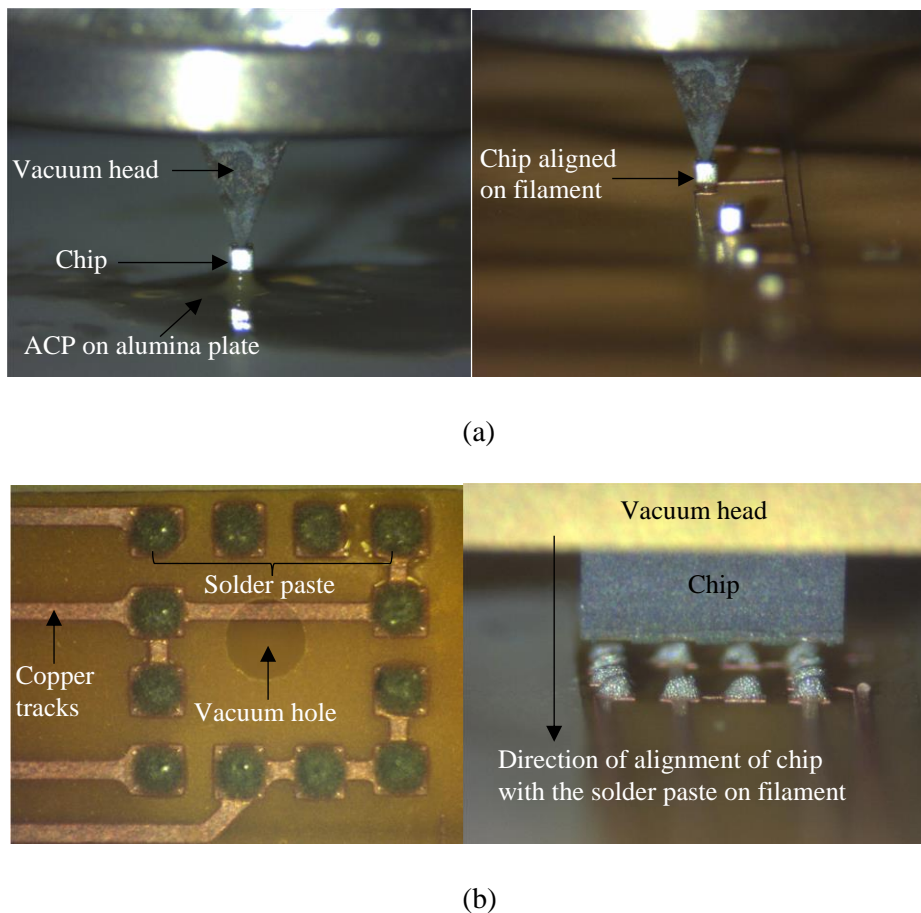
(a) Mounting of a thermistor chip with ACP and (b) Mounting of components on filament using stencil printed solder paste
